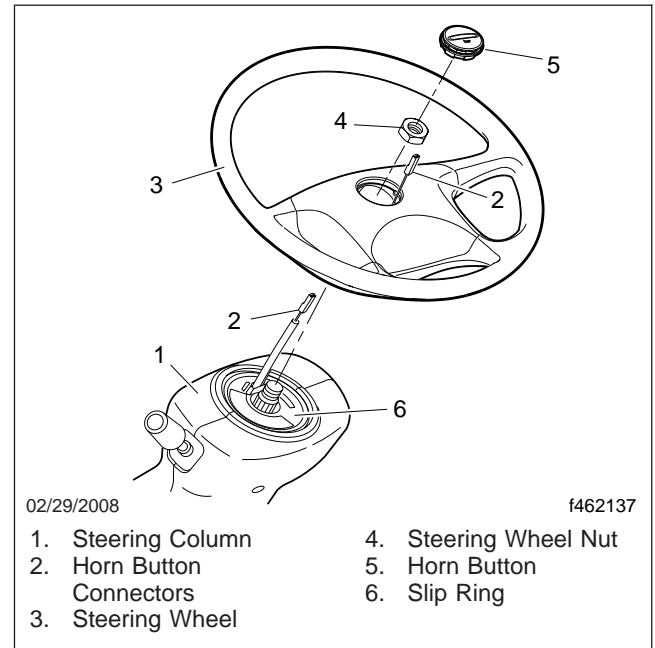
, Steering Wheel Cover Module and Connectors, No Air Bag
